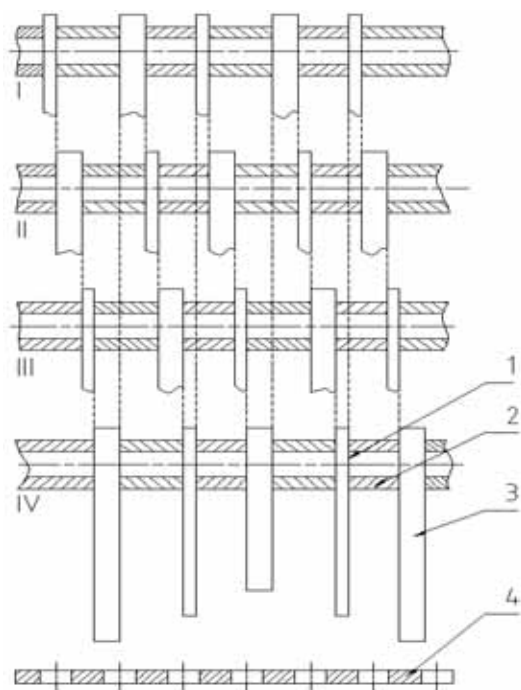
Scheme of working set of grinding rotor, after modernization (unfold version):
